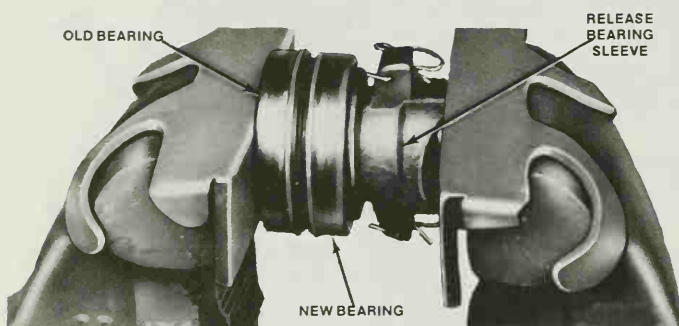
A new release bearing is pressed on the sleeve using the old bearing and a vise. (Chrysler Corporation)
